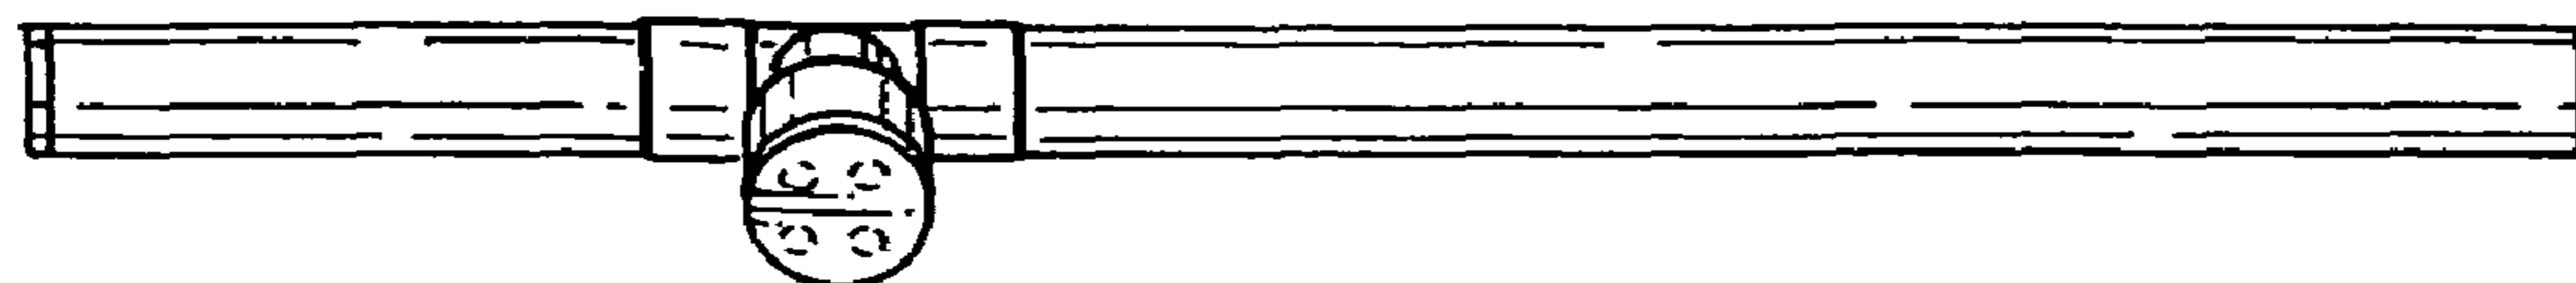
is a top plan view of an automobile ignition cable ducting showing my new design;
